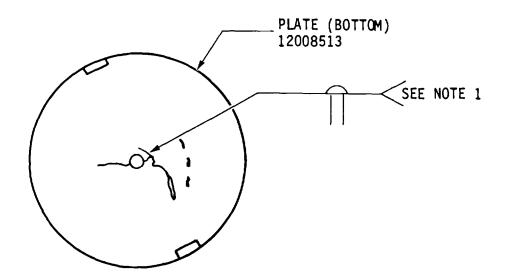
Repair welding procedure for cracks in bottom plate 12008513.
